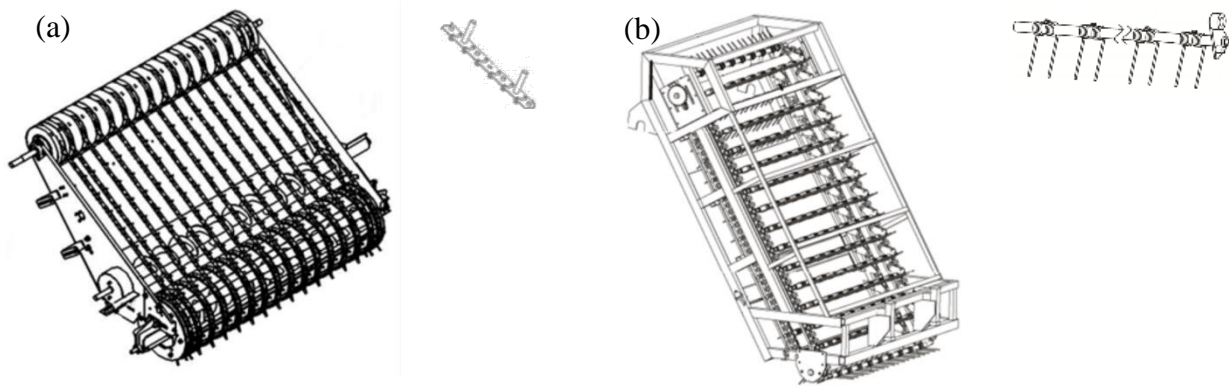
Key core components of the tooth-chain-type residual film recycling machine
